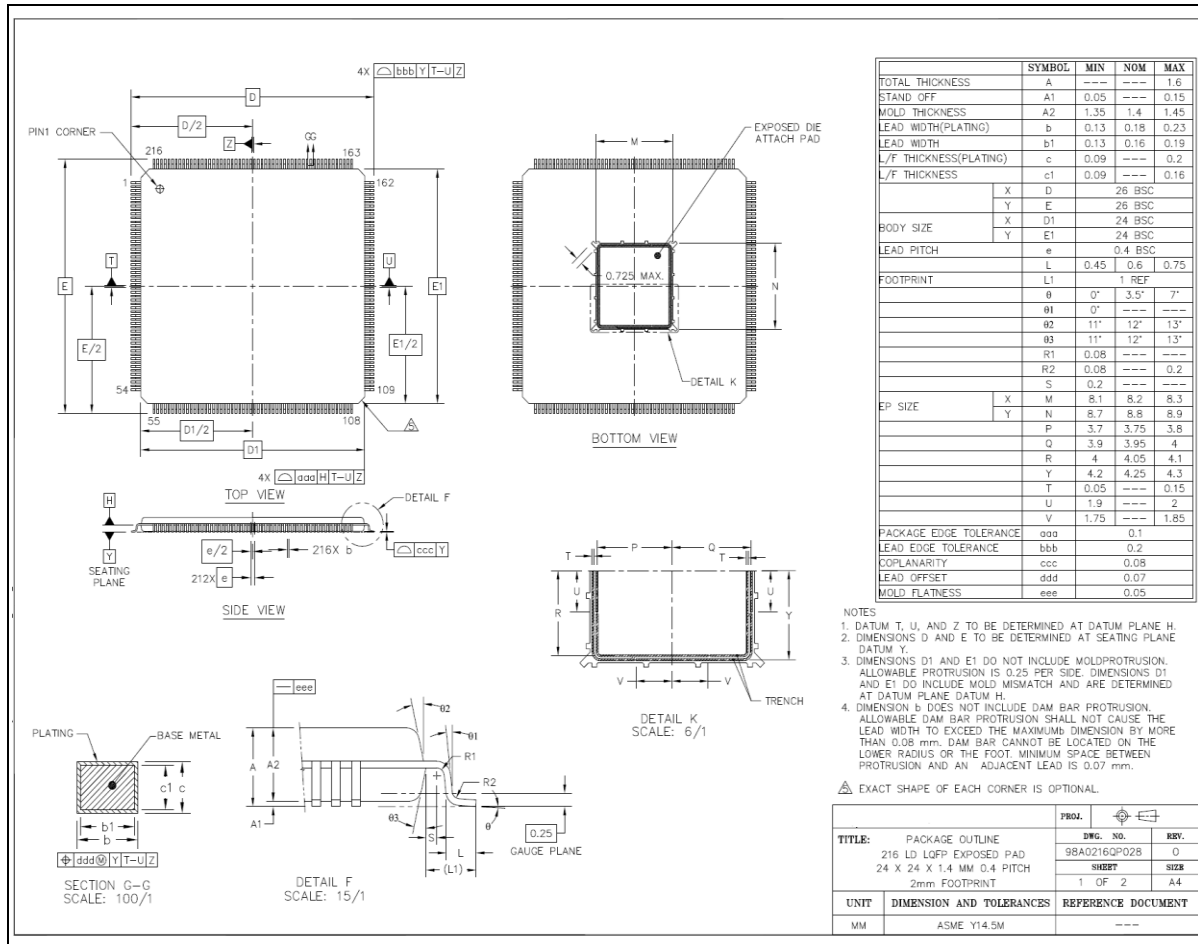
LQFP-EP 216-Pin Package Dimension
